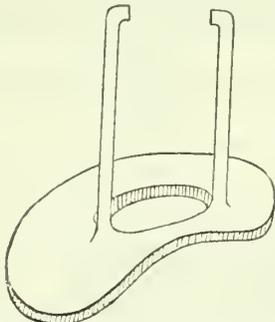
Sample casting which could be moulded just as it stands, and leave its own core.
